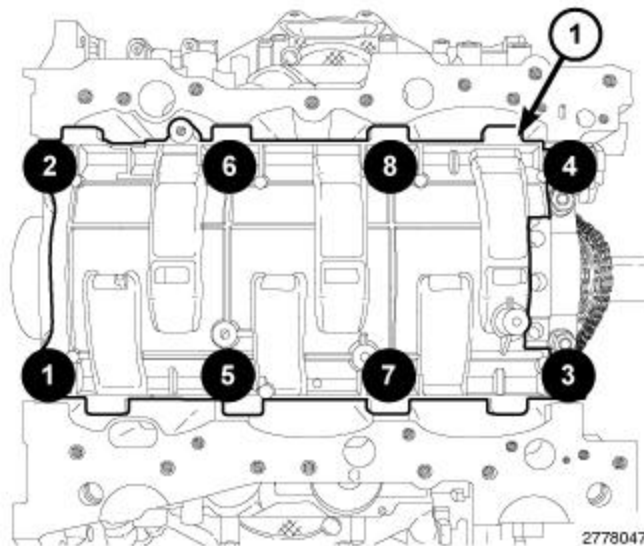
Main Bearing Cap Bolts From Windage Tray Removal Sequence
